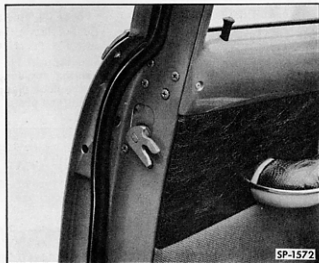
Weatherseal Installed at Front Door Lock (4-Door Styles)
